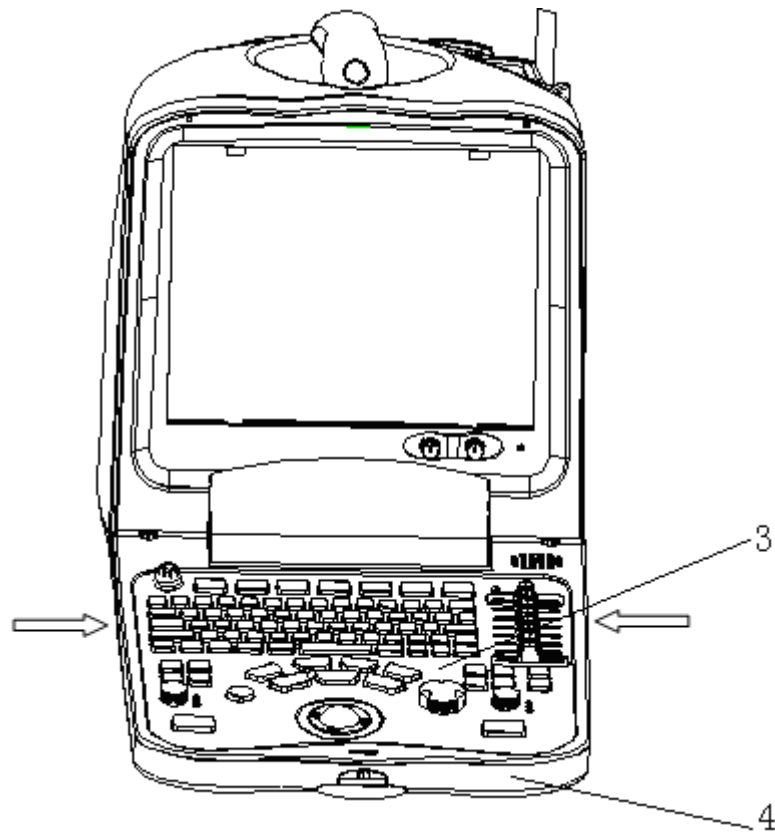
Sketch Map of Top Cover of Keyboard Disassembly
